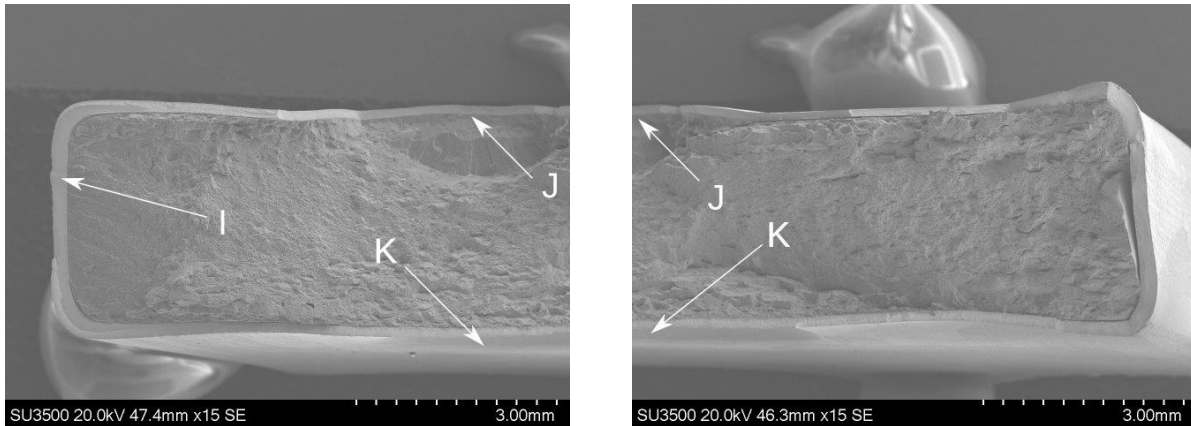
Tilted view of the fracture surface near Location H (per Figure 4.37) of Specimen H4, also showing the projectile impact site.
